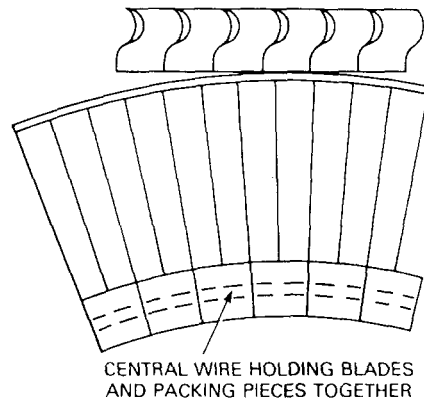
PARSONS SEGMENTAL BLADING (BRAZED)
